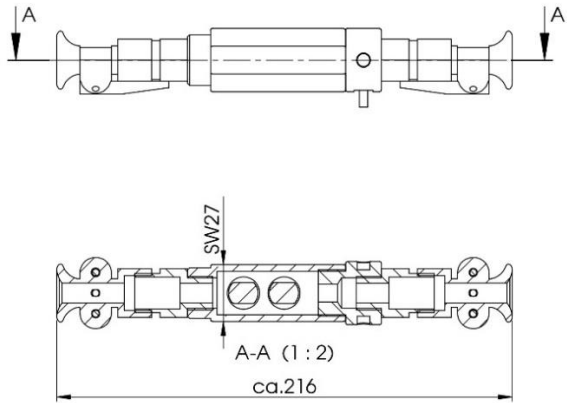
Sectional view KTOx-XX and KTSx-XX
